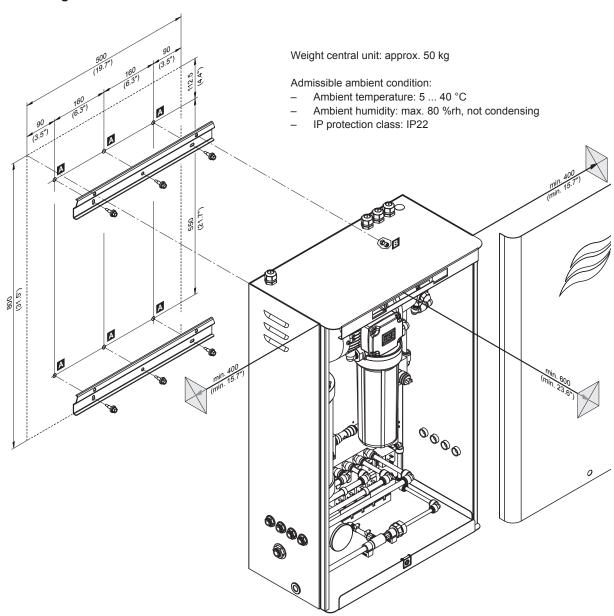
Mounting the central unit - dimensions in mm (Inch)
